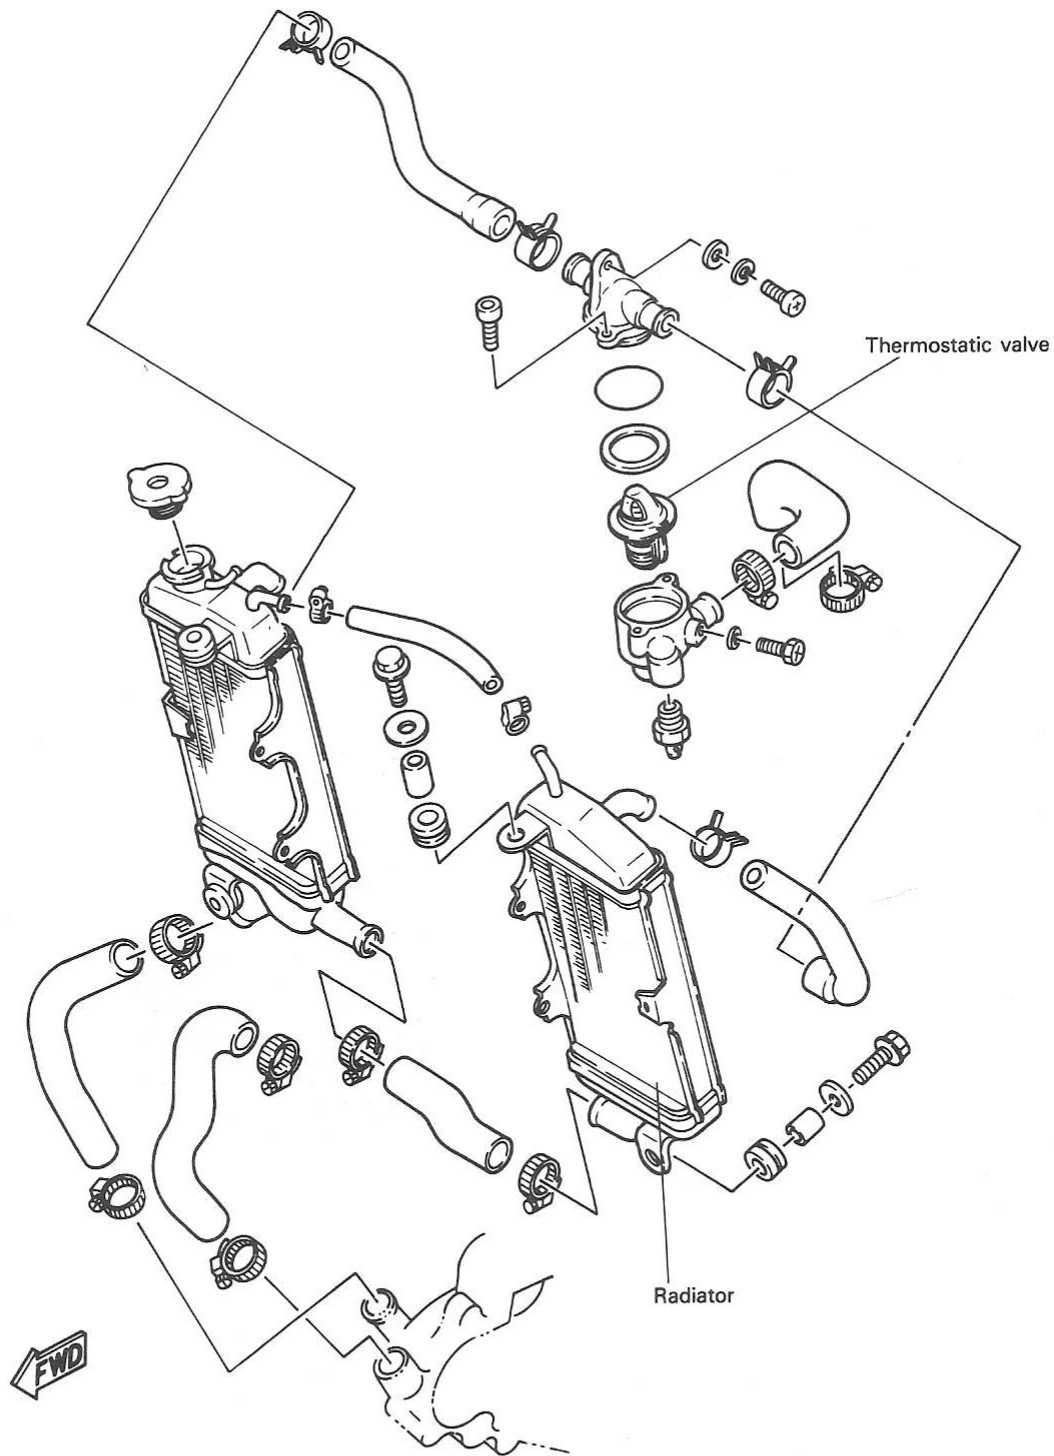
A.34 Cooling system components — exploded view (YTZ 250) (Sec 26)
